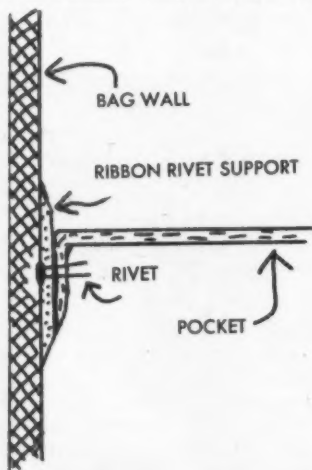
SCHEMATIC ILLUSTRATION OF TECHNIQUE BY WHICH POCKET MAY BE ANCHORED TO THE BAG WALL (Horizontal Section)
